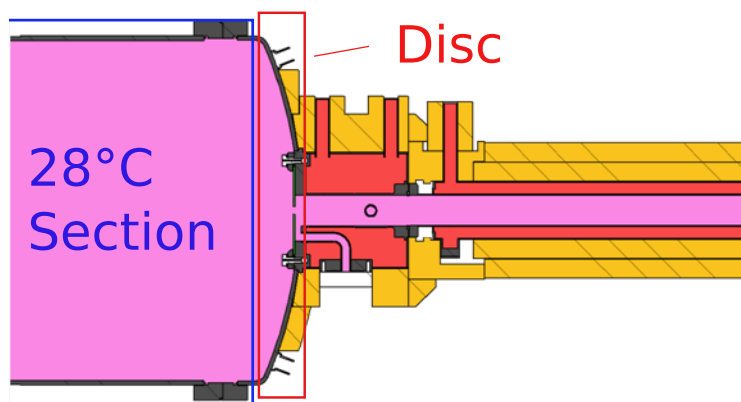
WDL Ends design with expansion chamber and disc representation shown.
